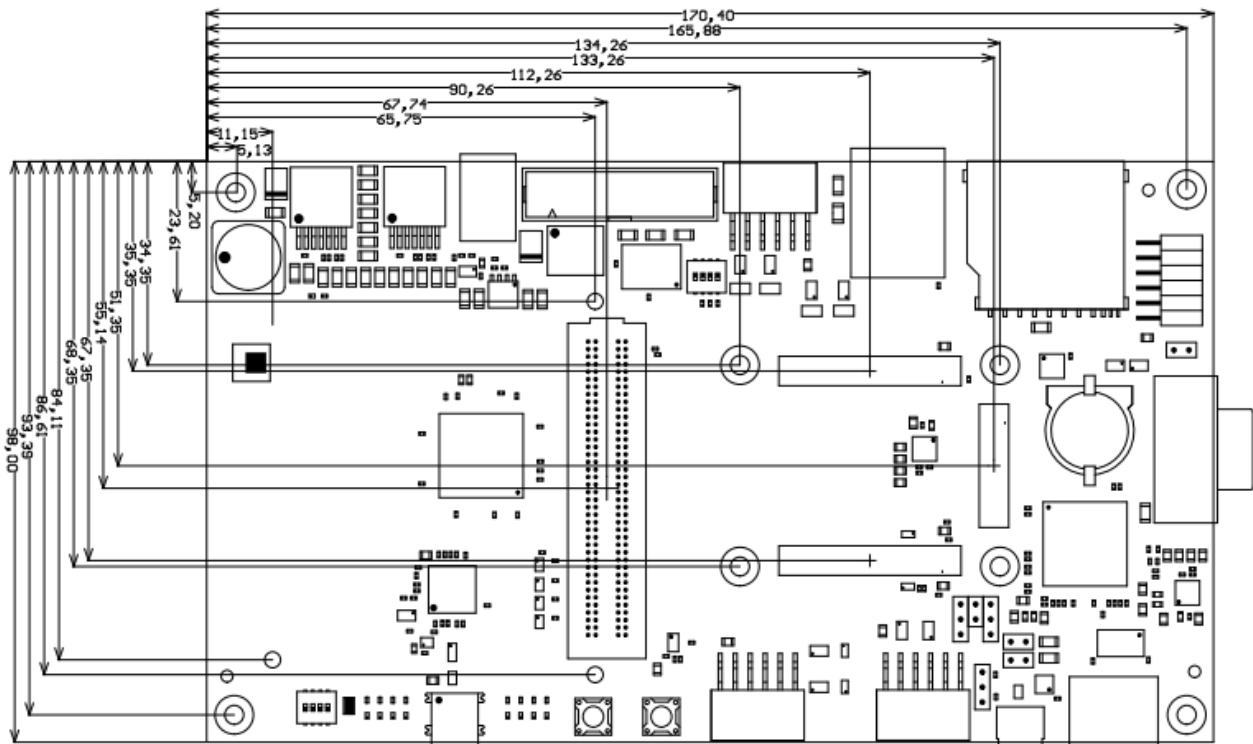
Physical Dimensions of the TE0701-06 carrier board
